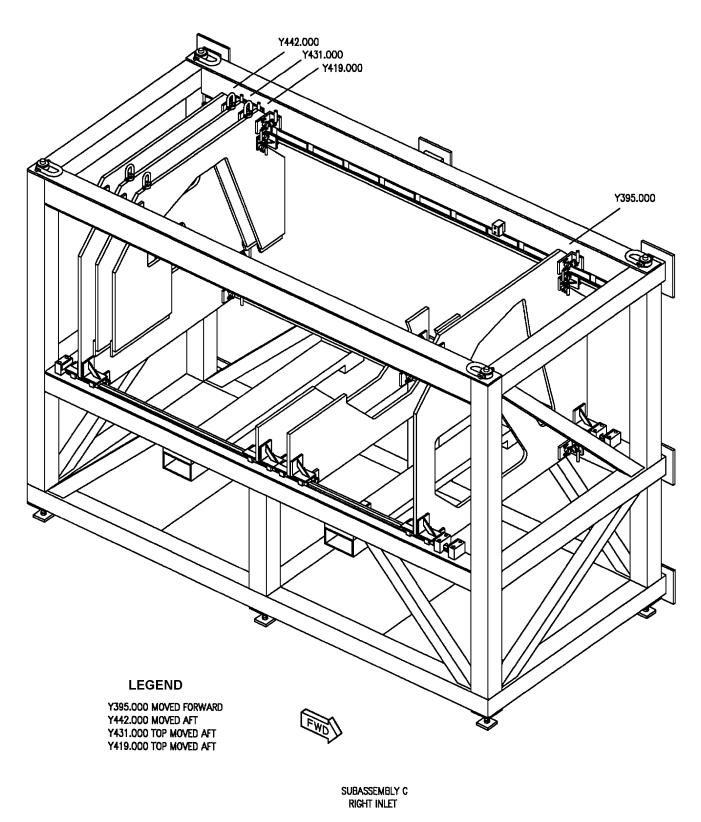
Engine Air Inlet Maintenance Fixture Support Boards; Prepared to Receive Inlet
